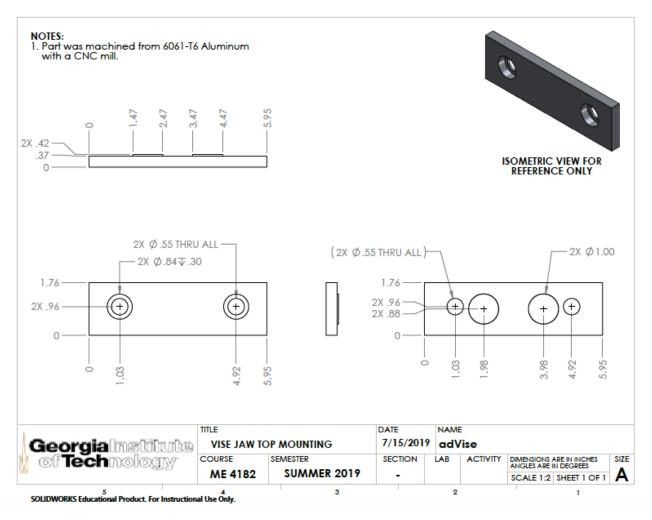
Top Mounting Plate for Vise Jaw Assembly.
